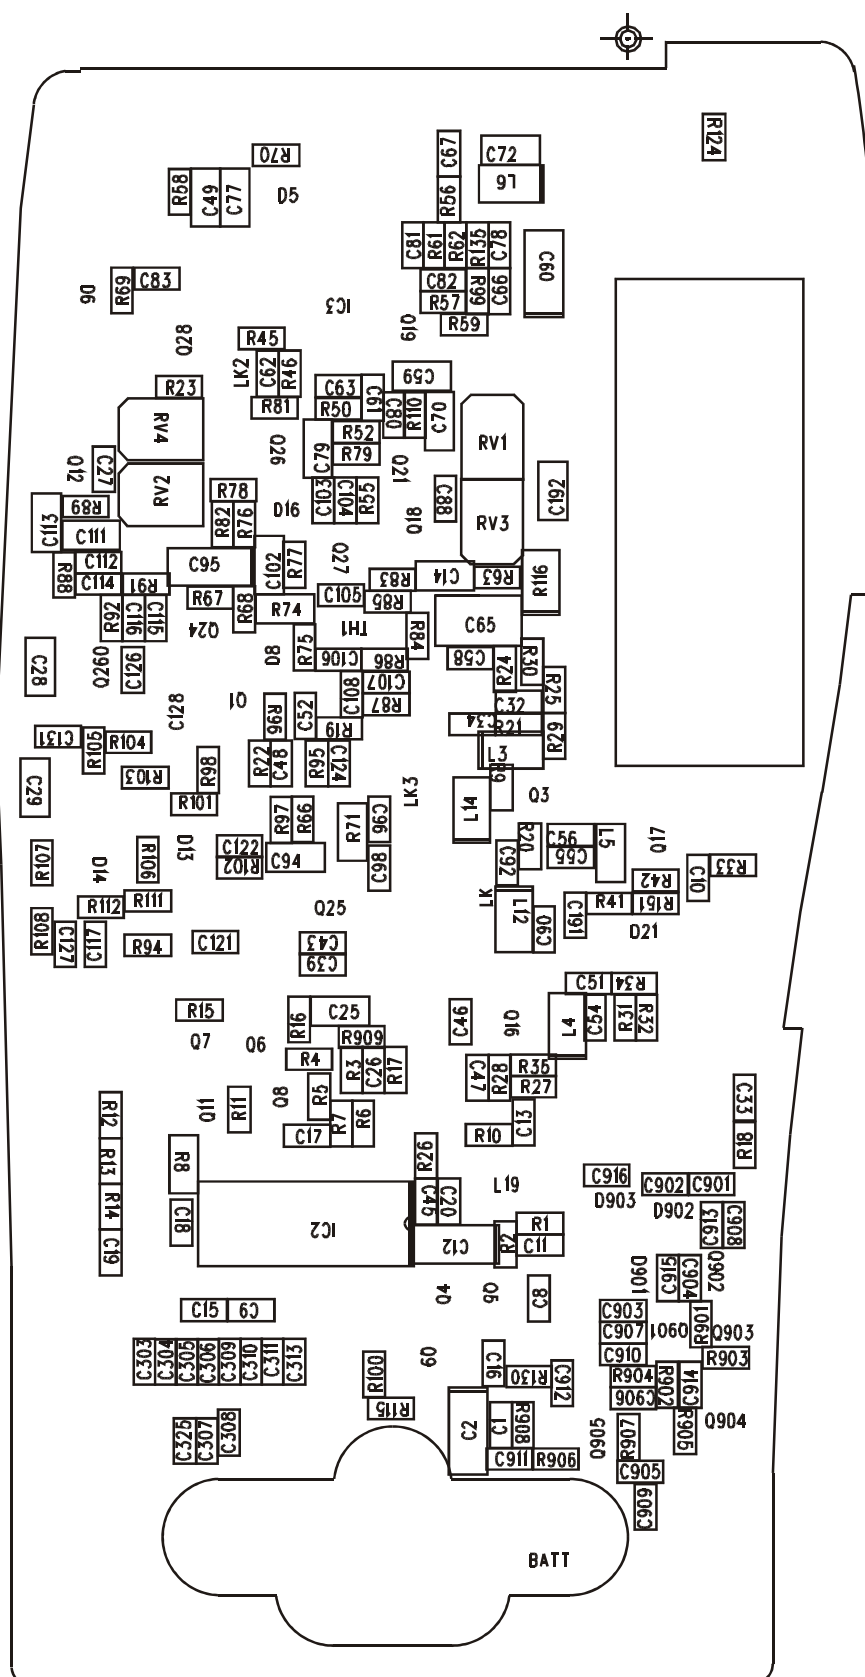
Legend Layout for Bottom Side of RF PCB
